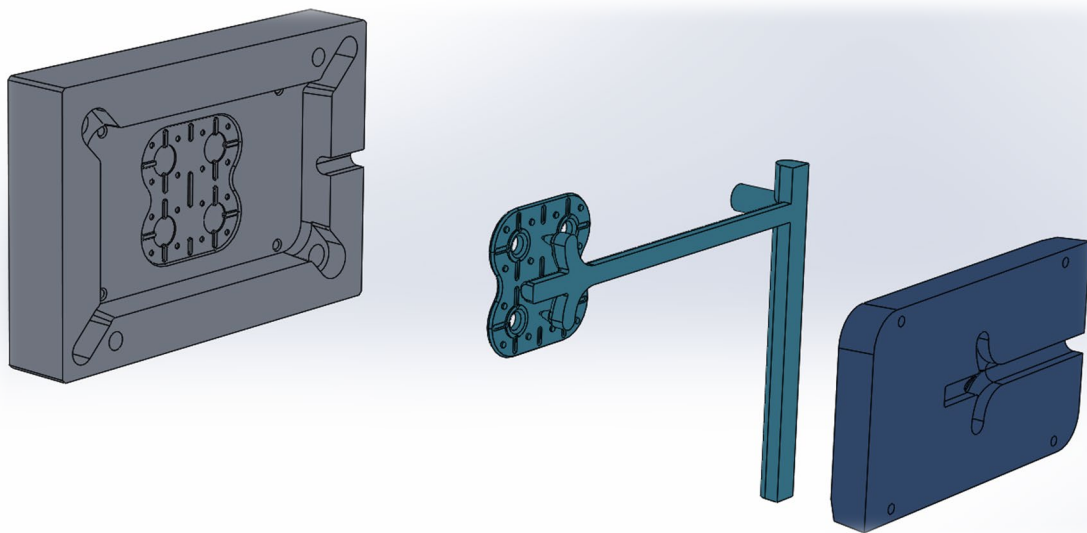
Two Shot Tool Version 2: Fiber held in place by pins and bars in tool geometry
